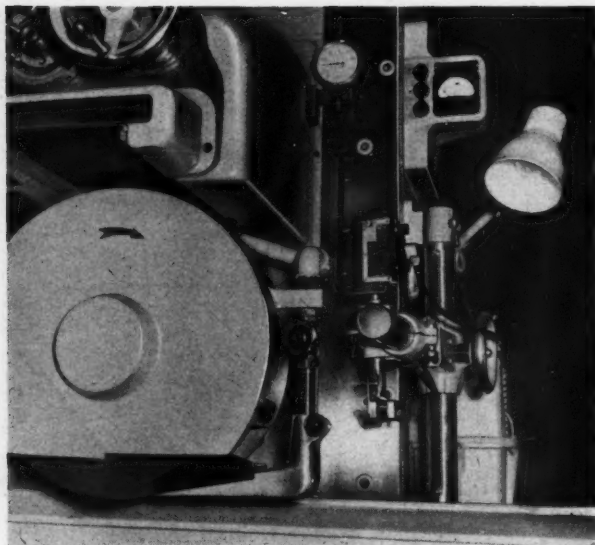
The automatic cycle of the type 3722 surface grinder is controlled by means of this gauging unit, which is mounted on the side of the column, and can be adjusted both vertically and horizontally
